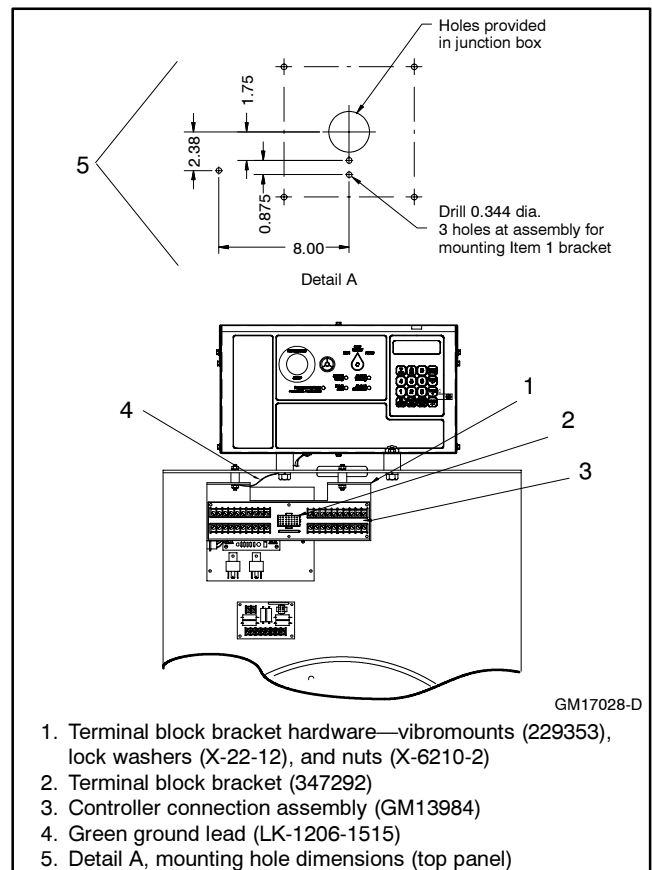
Terminal Block Bracket and Controller Connection Assembly Mounting (350/400 kW)
